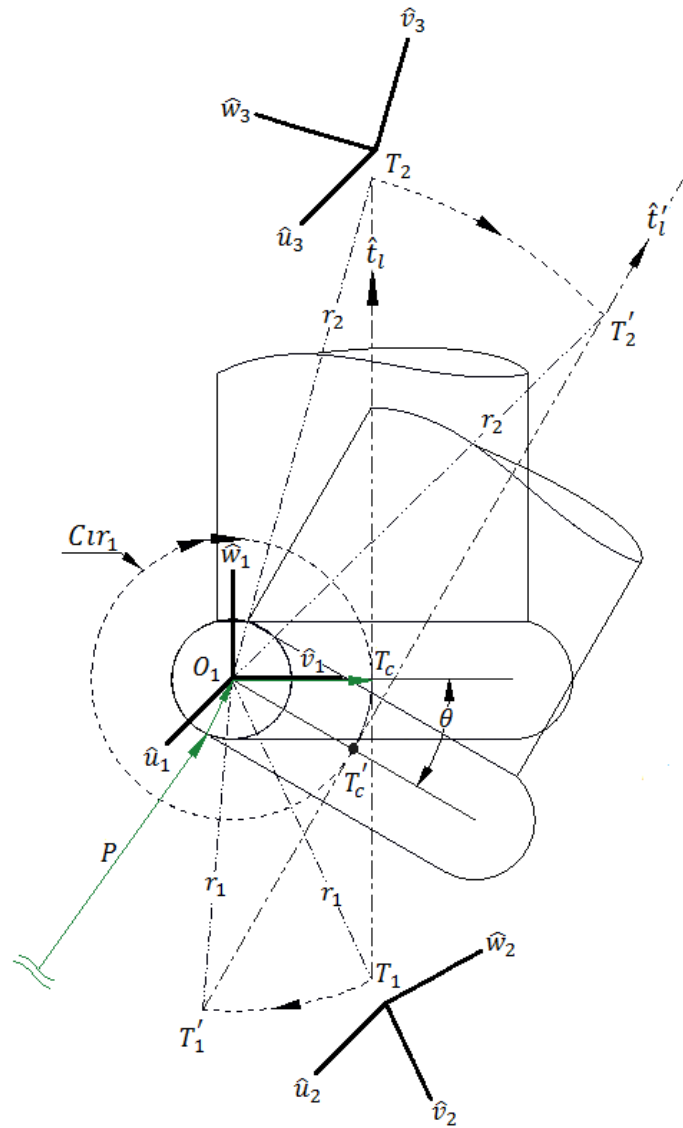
Radiused end mill rotated about center of pseudo-insert O_1
